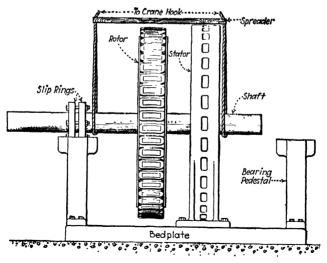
Showing second step in a method of threading the rotor of a synchronous motor through its stator.
